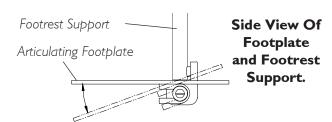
ADJUSTABLE ANGLE FLIP-UP FOOTPLATE ANGLE ADJUSTMENT
